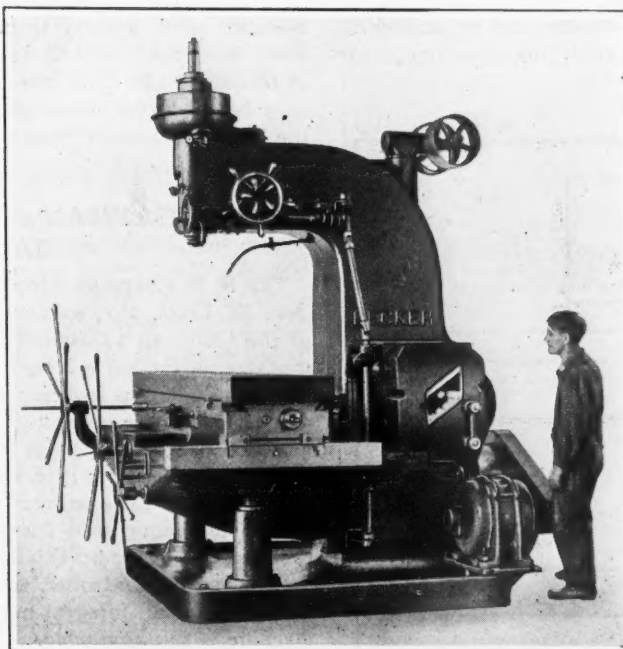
Model D-1 Die-sinker built by the Becker Milling Machine Co.
